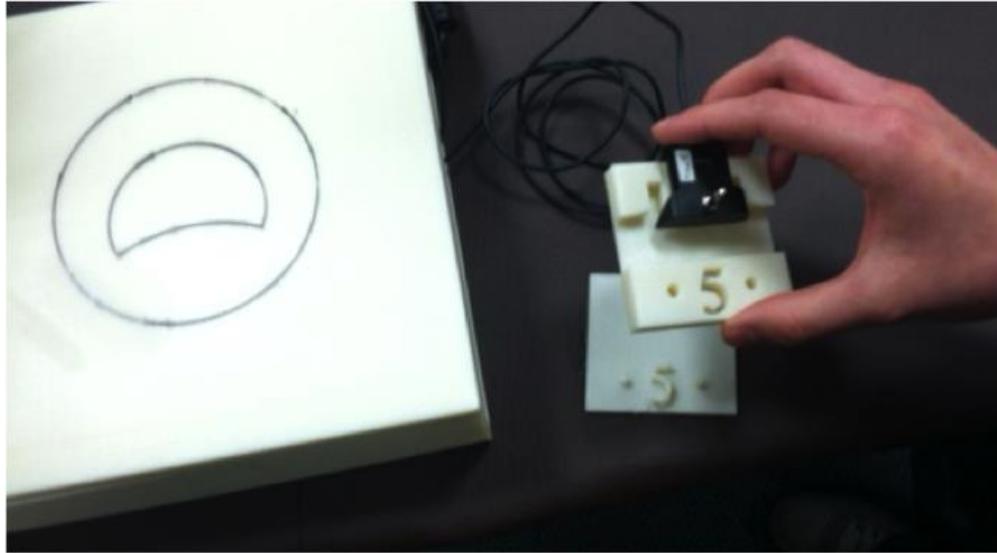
Demonstration of Assembly using Speaker Stand, Mat, and USB Hub Box
